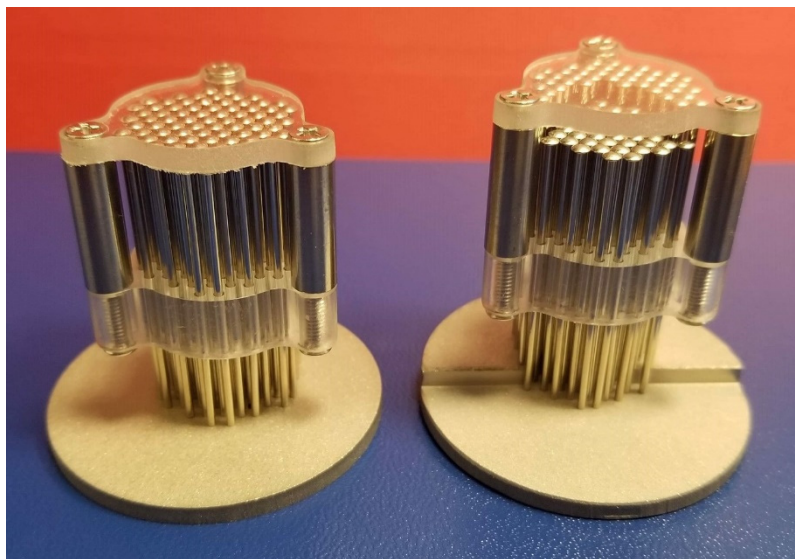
Photograph of MPPT device on flat (left) and featured (right) surfaces.
